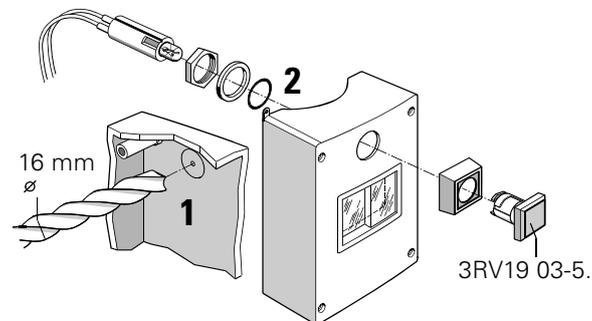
Indicator light installation in a molded-plastic housing (example: frame size S00)
